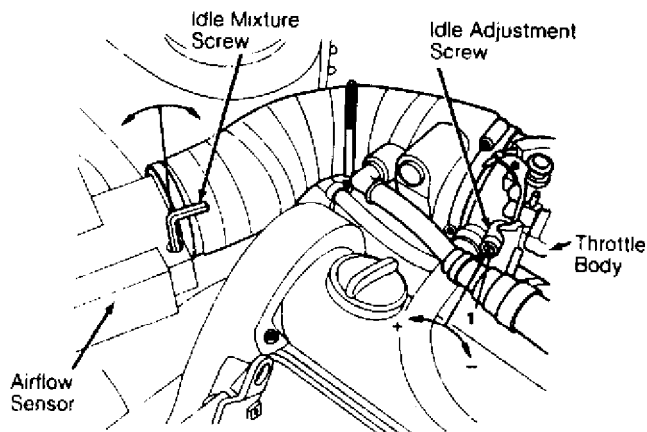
Idle Mixture Screw & Adjustment Screw (1.8L)
